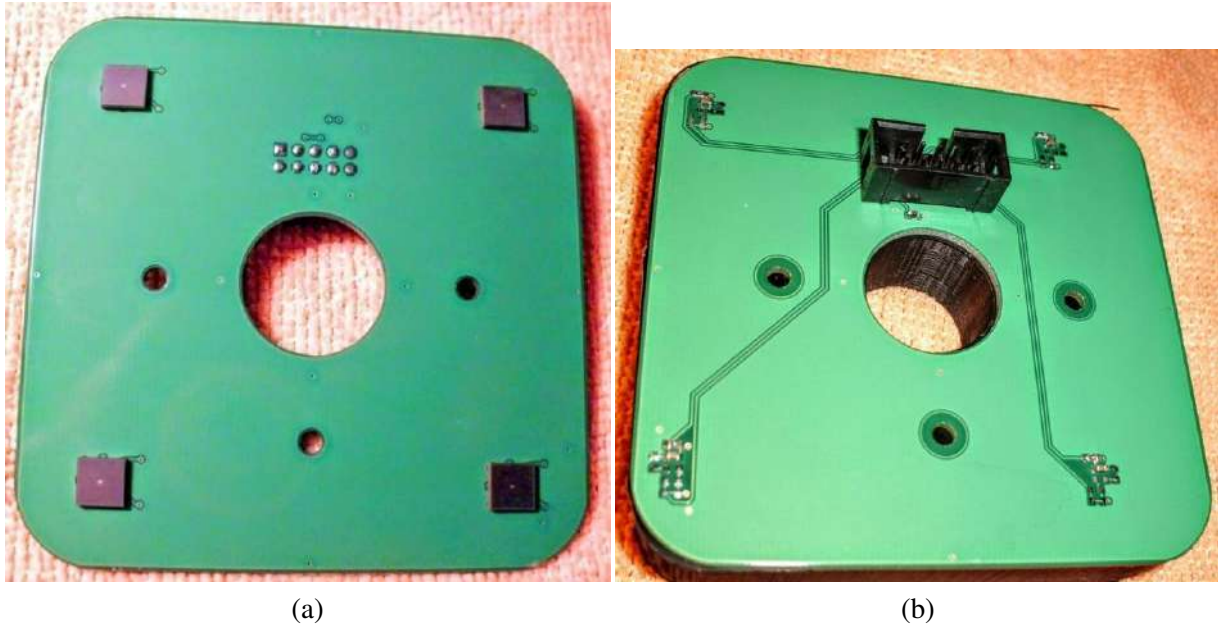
Printed circuit board with 4 MPPC diodes: front (a) and back (b) sides.
